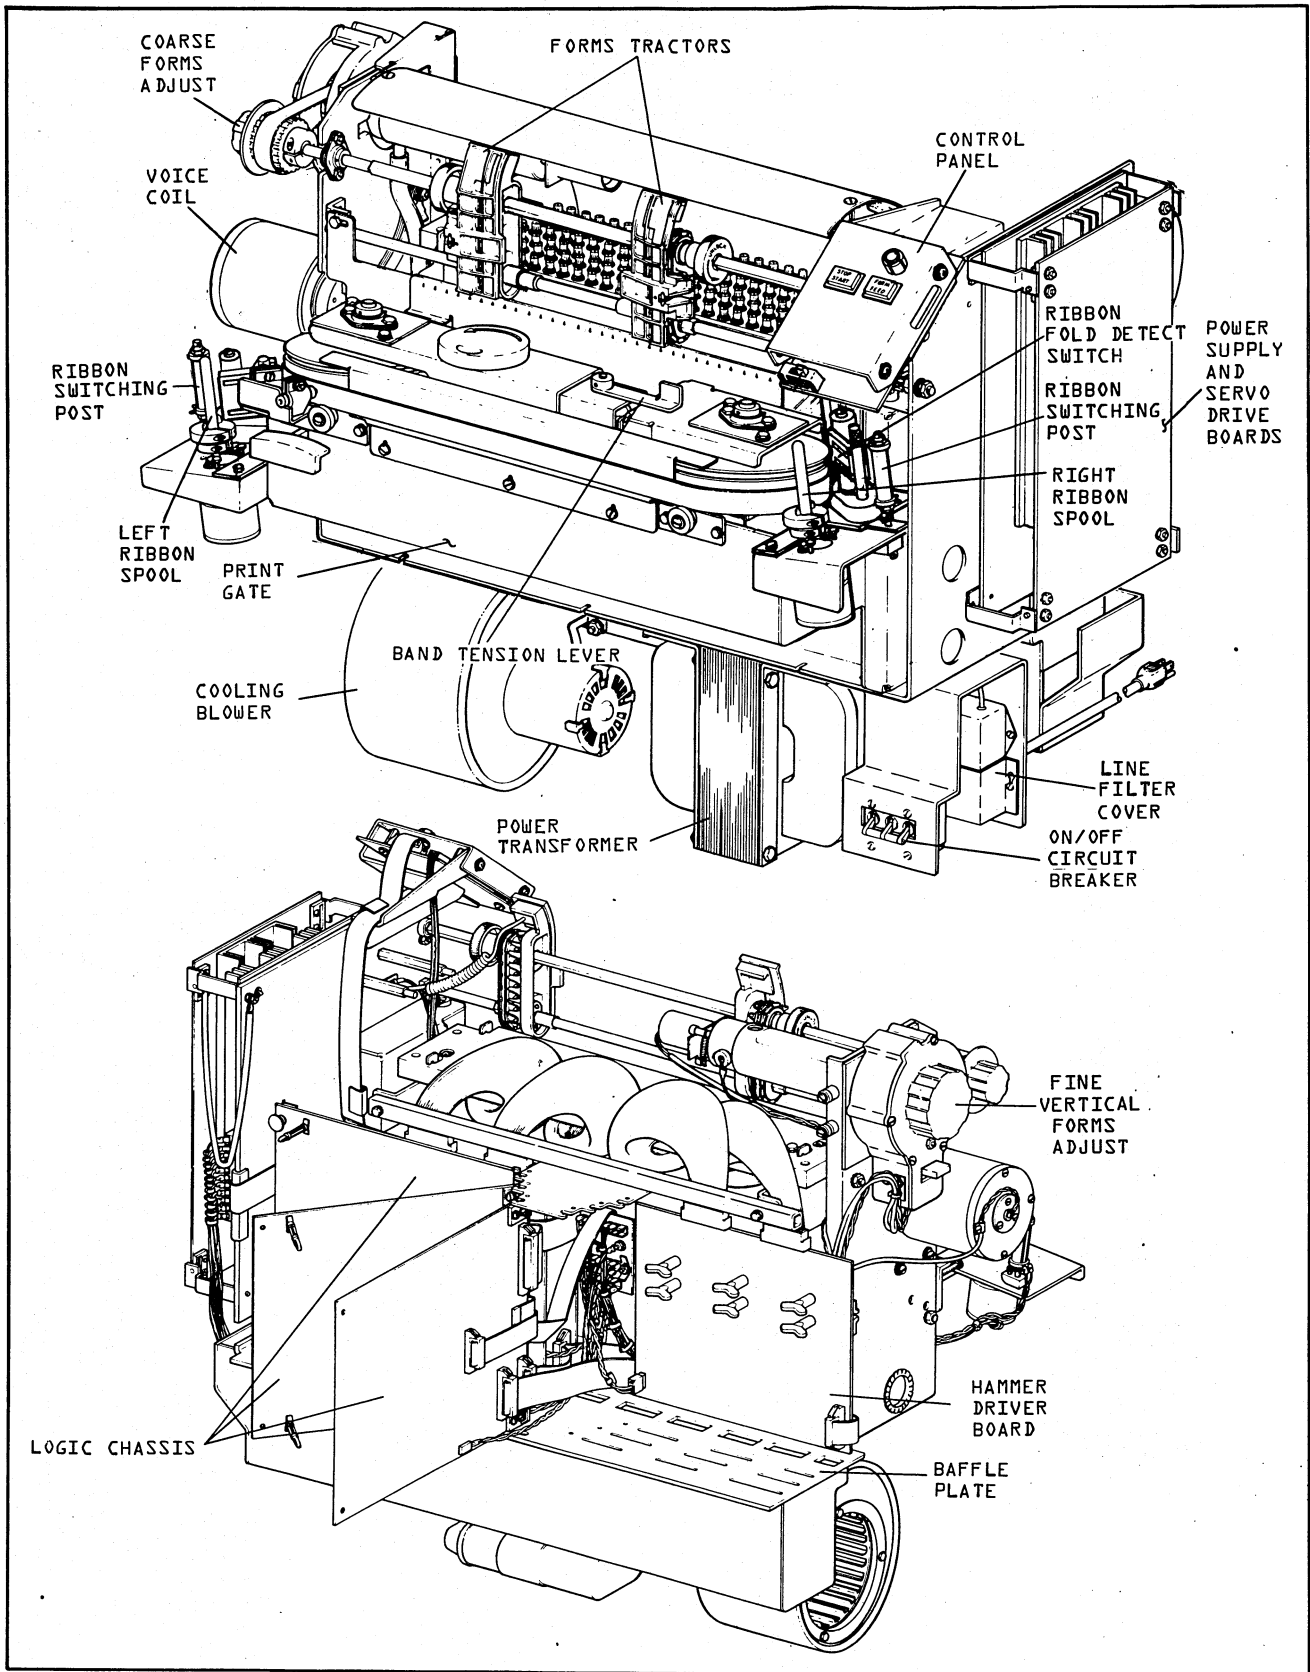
MAJOR ASSEMBLY LOCATOR
